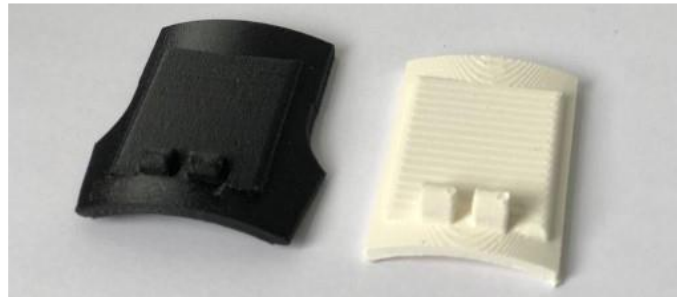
Housings of the SIDI tensioner. Two housings with few dimensional changes for exactly fitting the SIDI tensioner.
